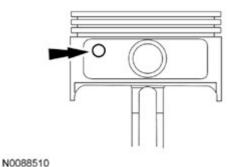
Identifying Piston Ring Gap Courtesy of FORD MOTOR CO.
